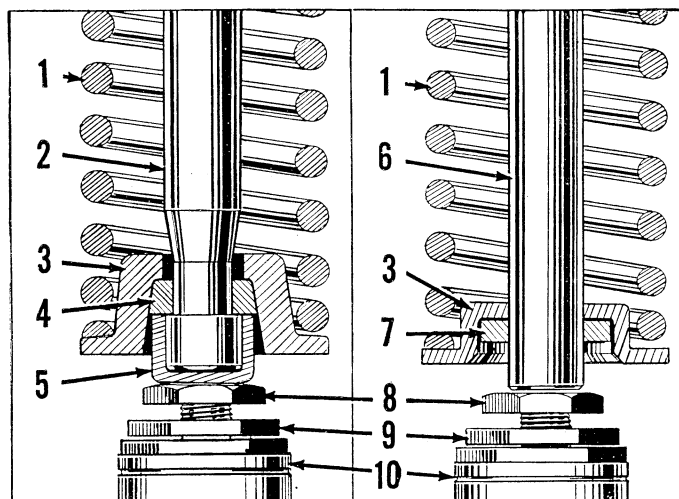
Continental N62 exhaust and inlet valves. Valve rotators are used on exhaust valves only.
